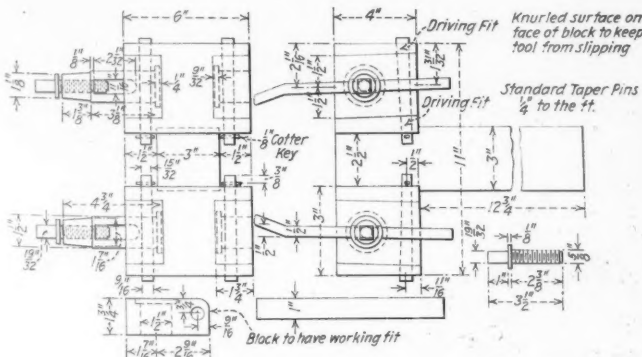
Detail arrangement of tool used for cutting on the return stroke of the planer
